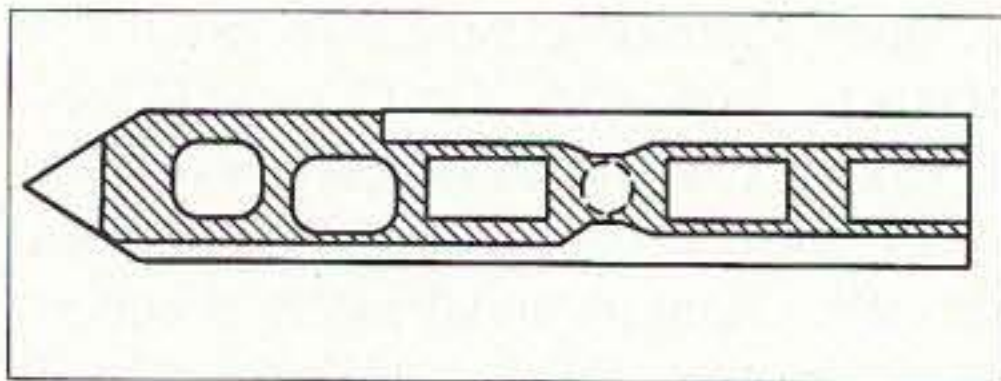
Single-sided printed circuit board layout for the NEC UPC1651 FET probe.
